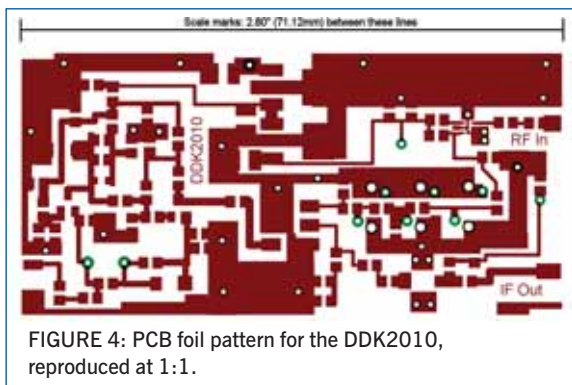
PCB foil pattern for the DDK2010, reproduced at 1:1.
